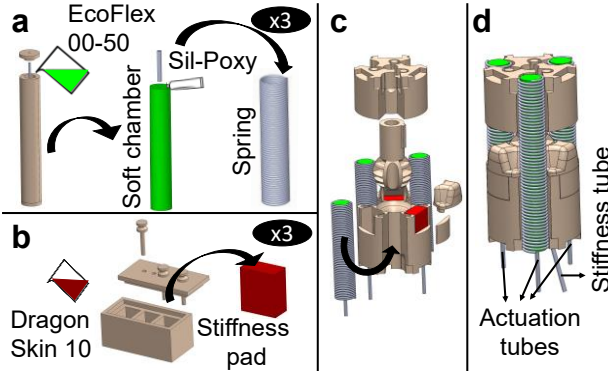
Manufacturing of (a) the spring-reinforced actuators and (b) soft pads; (c) assembly of the module by integrating the spring-reinforced actuators and soft pads into the rigid structure; (d) final module.
